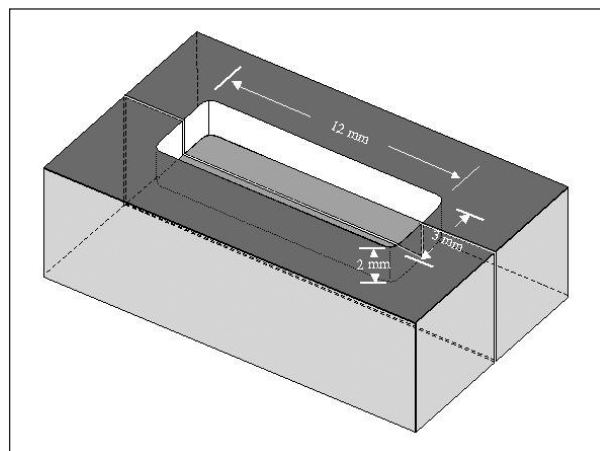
Schematic illustration of the split mold for fabricating specimens.
